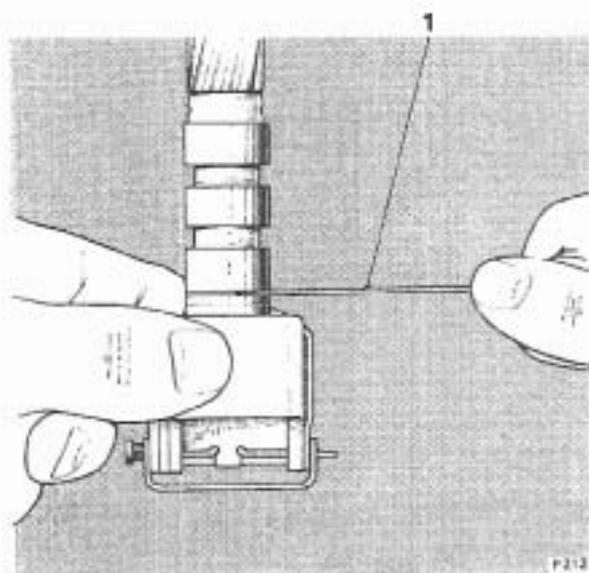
CHECK VALVE OPENING (EXHAUST)
